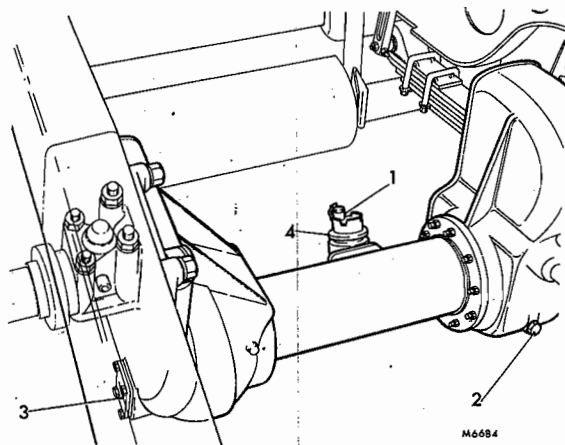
REAR AXLE FILLER AND DRAIN PLATE
